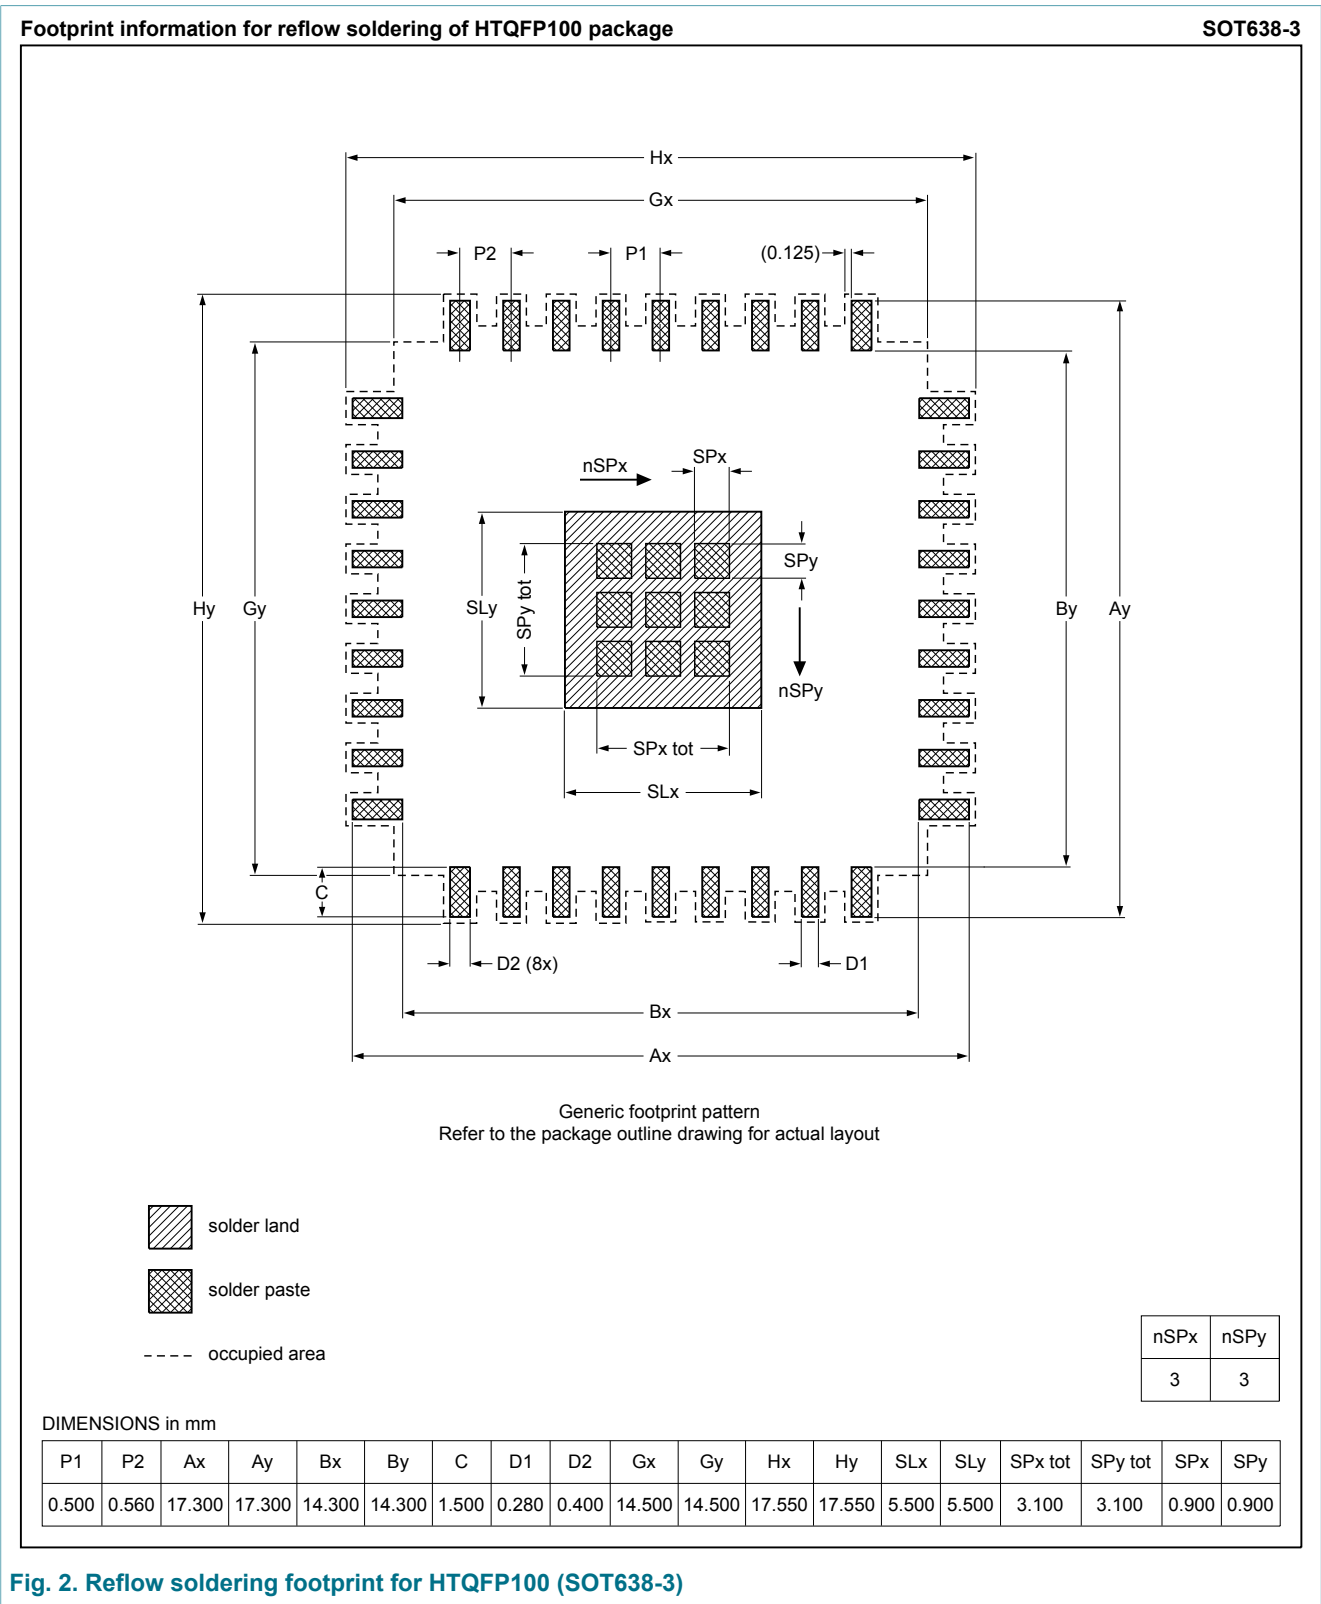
Reflow soldering footprint for HTQFP100 (SOT638-3)
